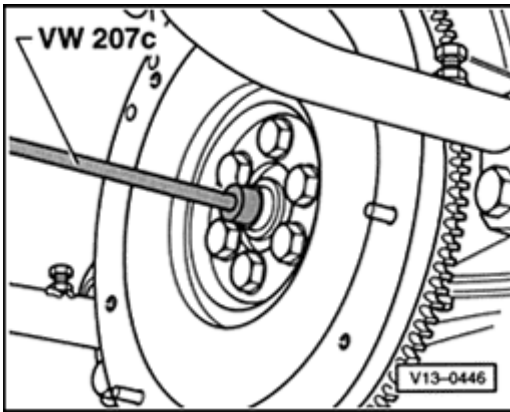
Driving In Needle Bearing Using Drift VW 207 C Or Centering Mandrel 3176
